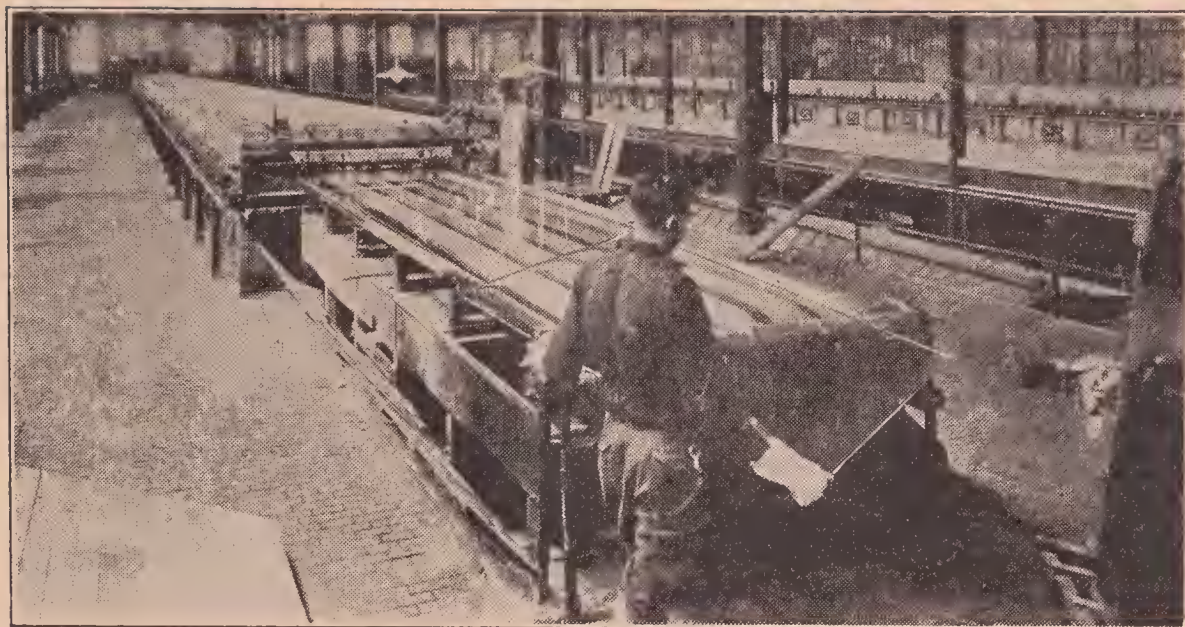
Removing a sheet of glass from an automatic sheet glass machine. The raw materials enter at one end and the sheets of glass are cut off at the other.
